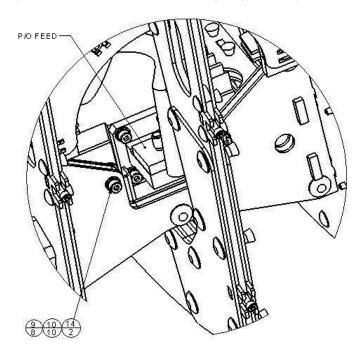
GILAT Ku-Band 4W ODU (BUC) Assembly – Detail M
